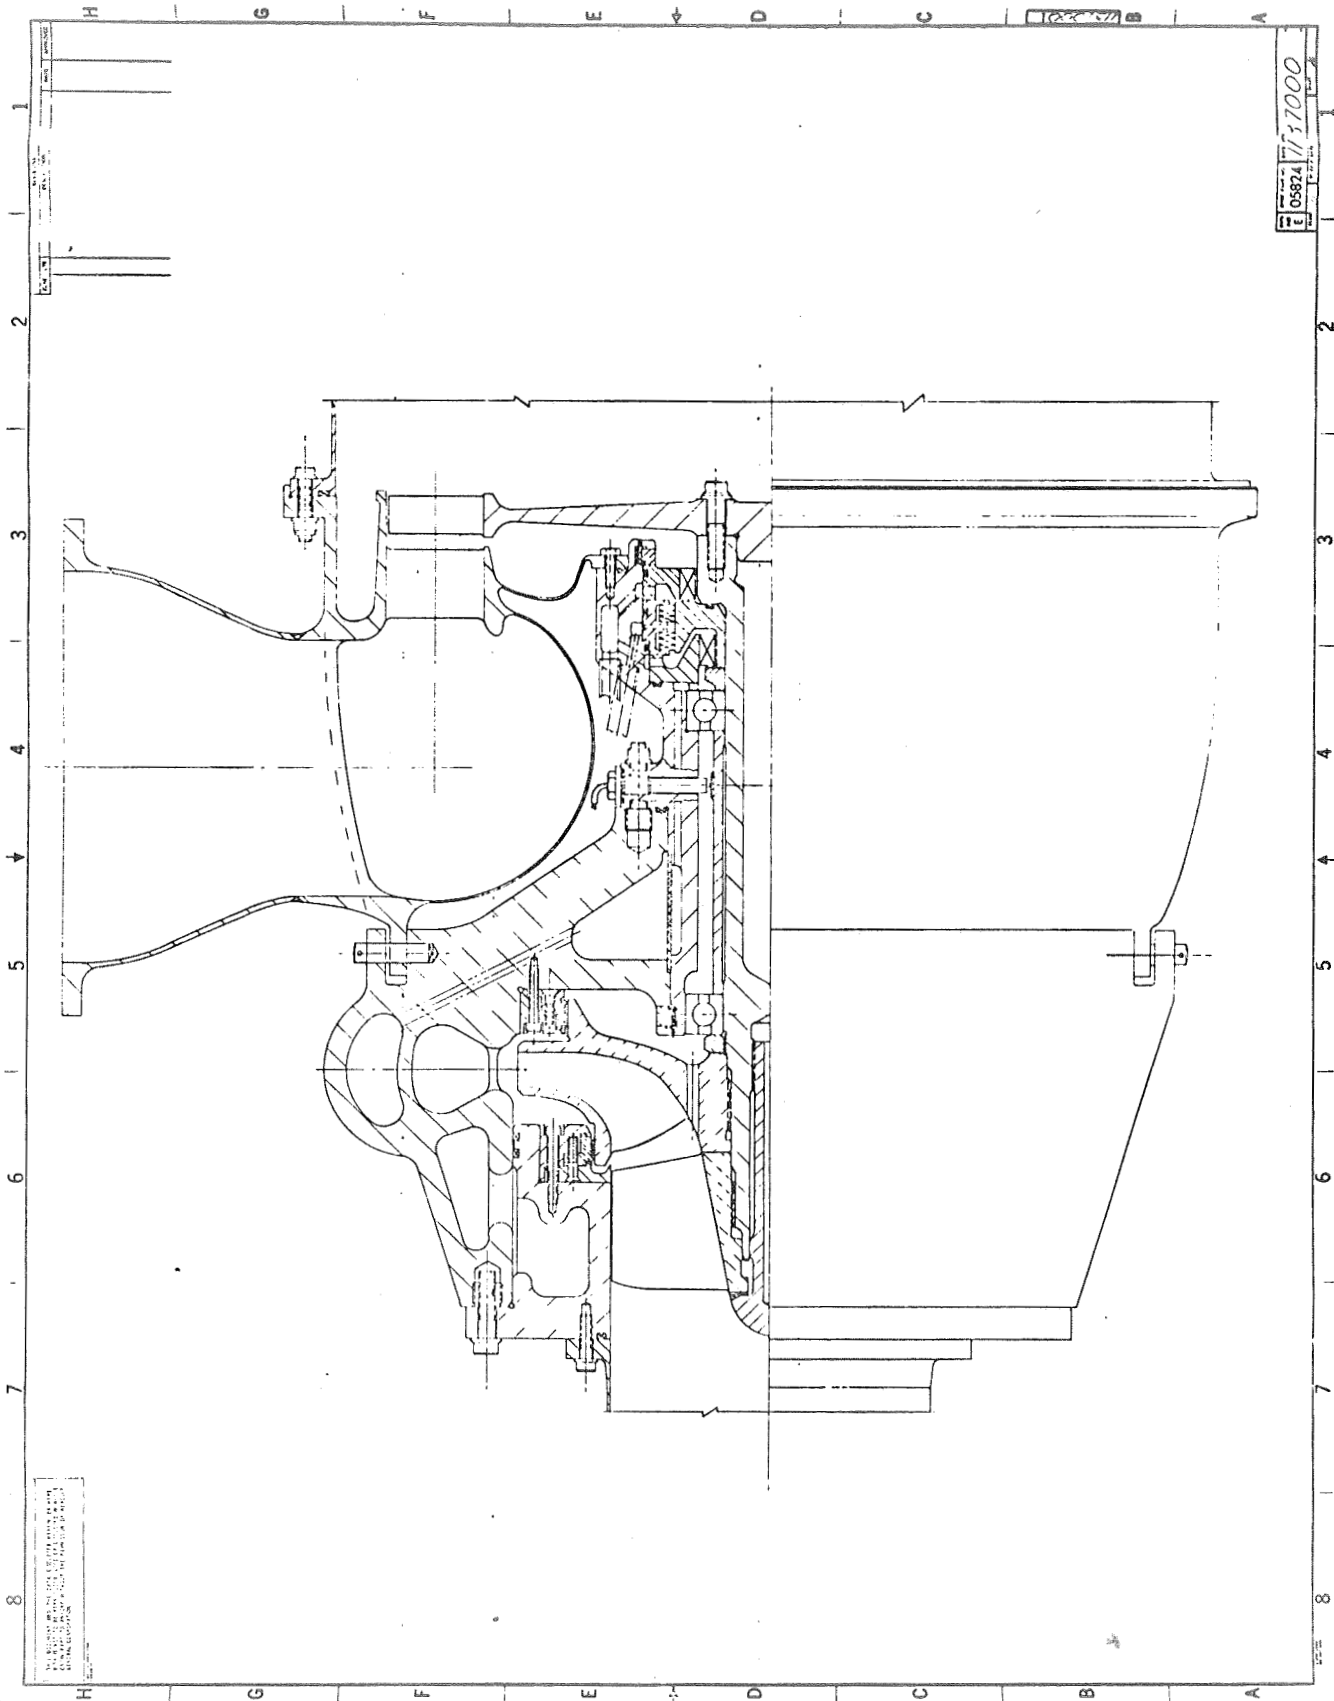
LOX Turbopump Assembly (Sheet 2 of 2)
